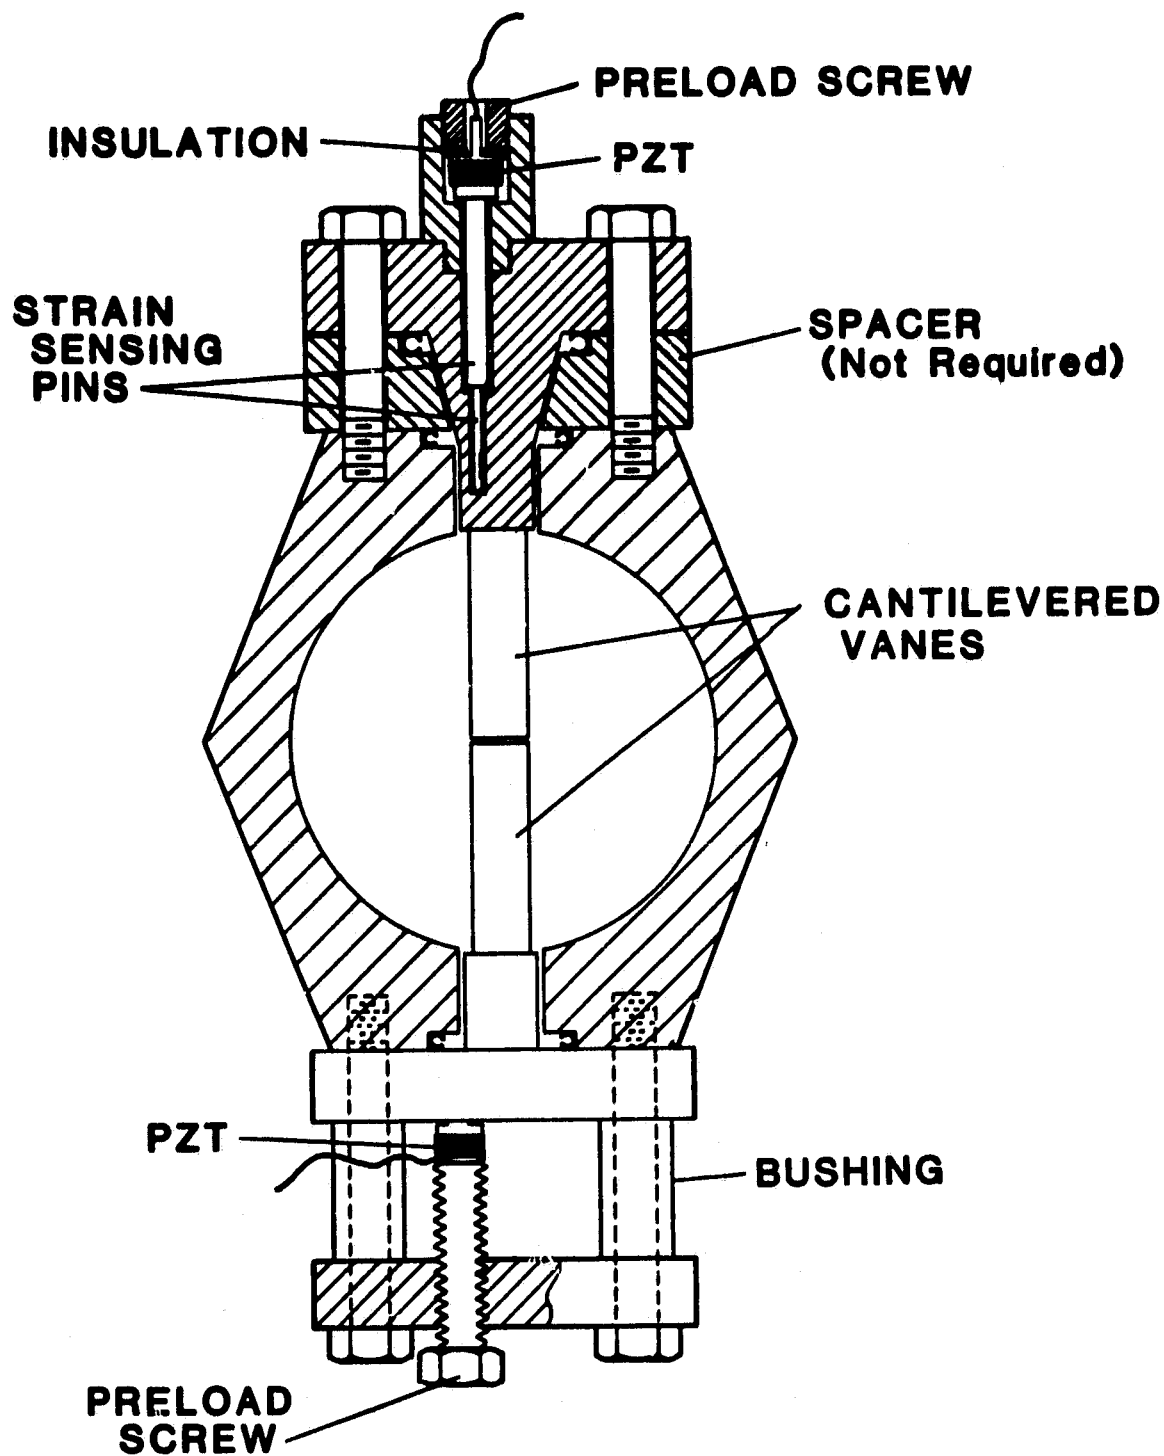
Cantilevered vane designs that eliminate the diaphragm seal. In the top port is vane 44. In the lower is vane 39B with a strain sensor on the mounting flange.
